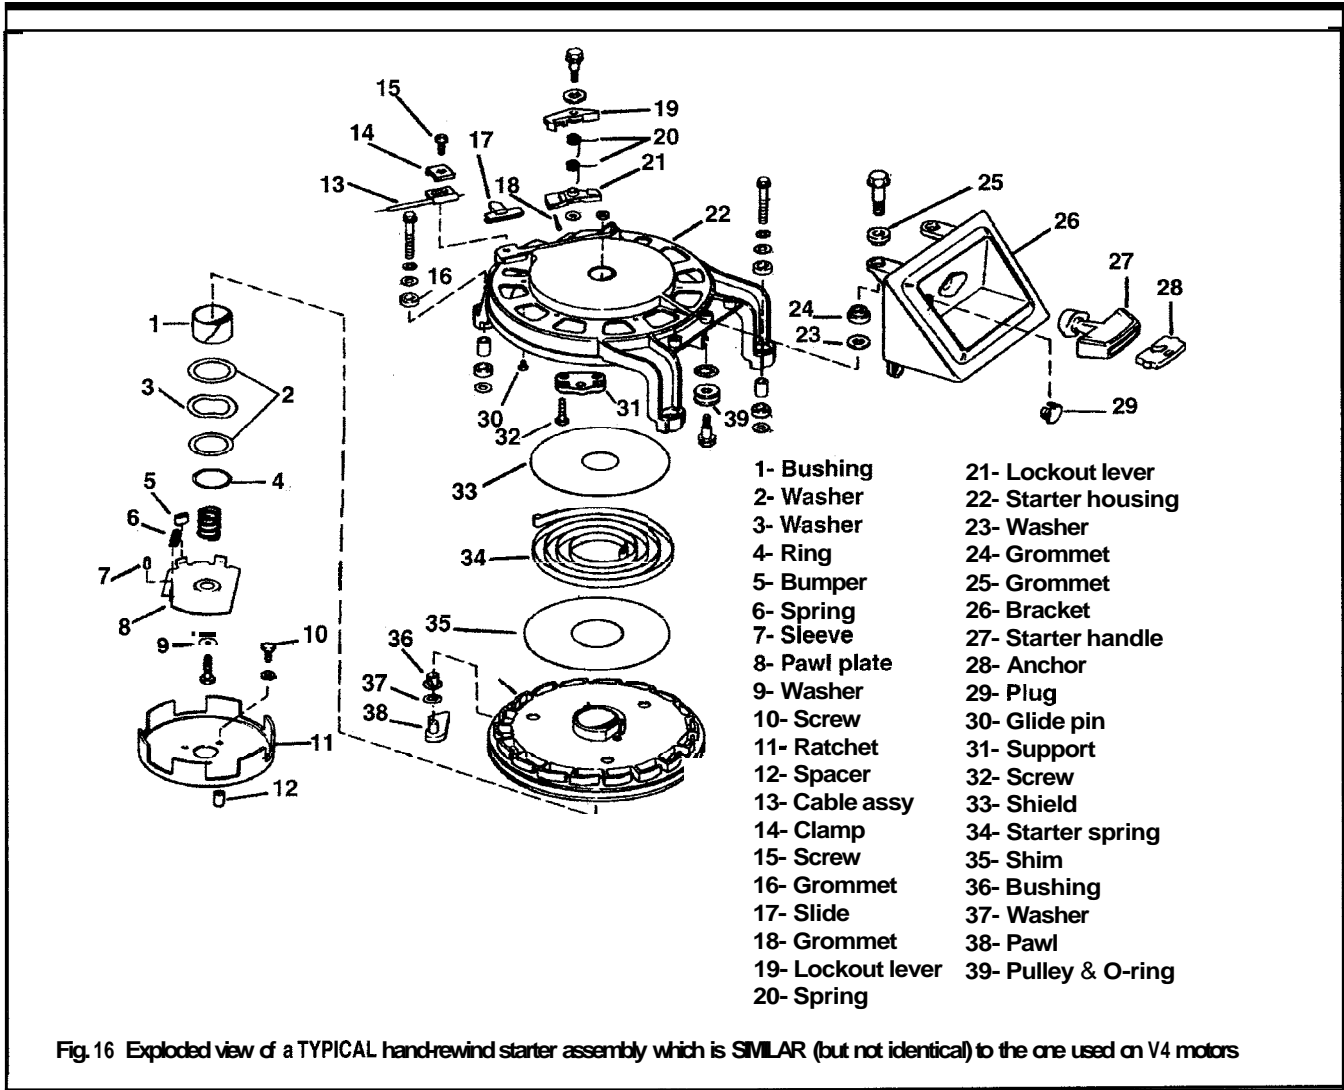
Exploded view of a TYPICAL handrewind starter assembly which is SIMILAR (but not identical) to the one used on V4 motors
